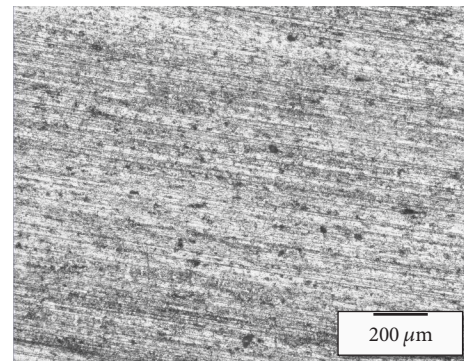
Optical microscopy for machined surface with speed 500 rpm, depth of cut 0.5 mm, and feed rate 50 mm/min.
